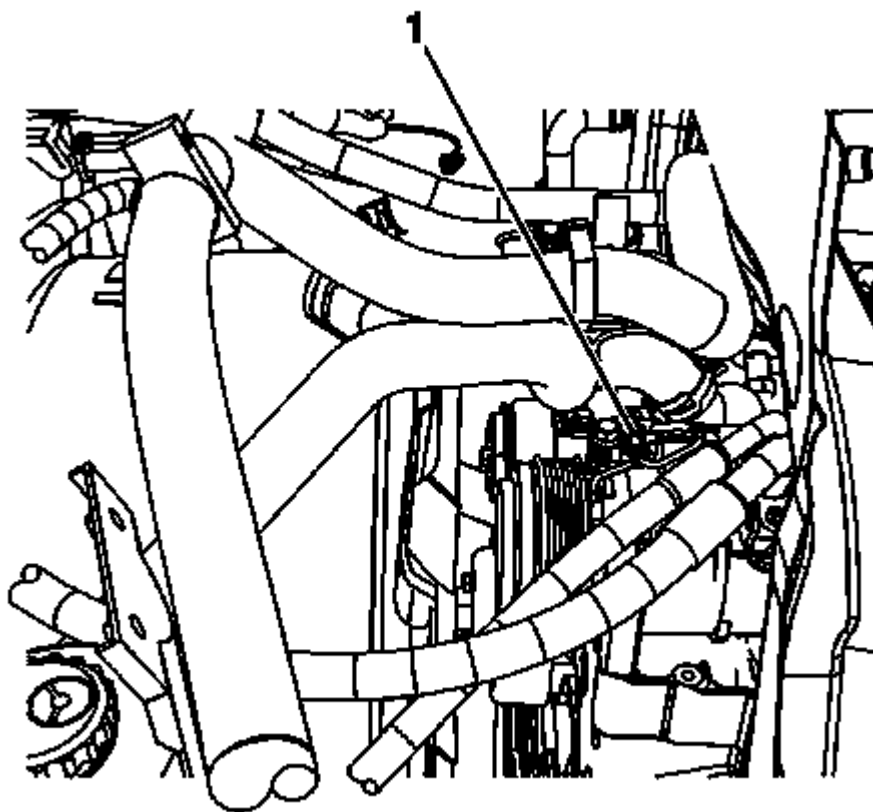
Locating Air Conditioning (A/C) Compressor Clutch
